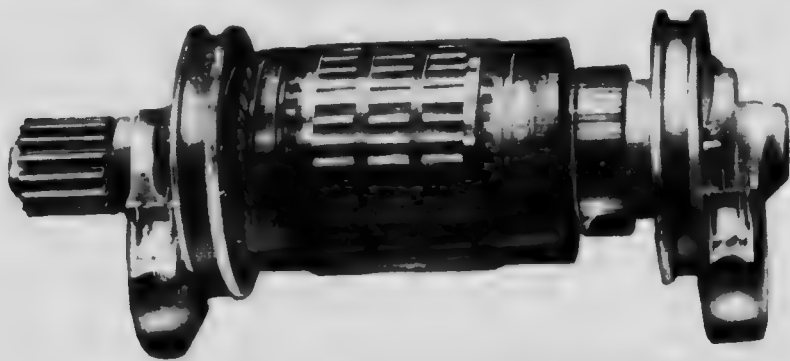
Armature of D.K. Tramcar Motor, showing Oil Reservoirs of Bearing Boxes.
